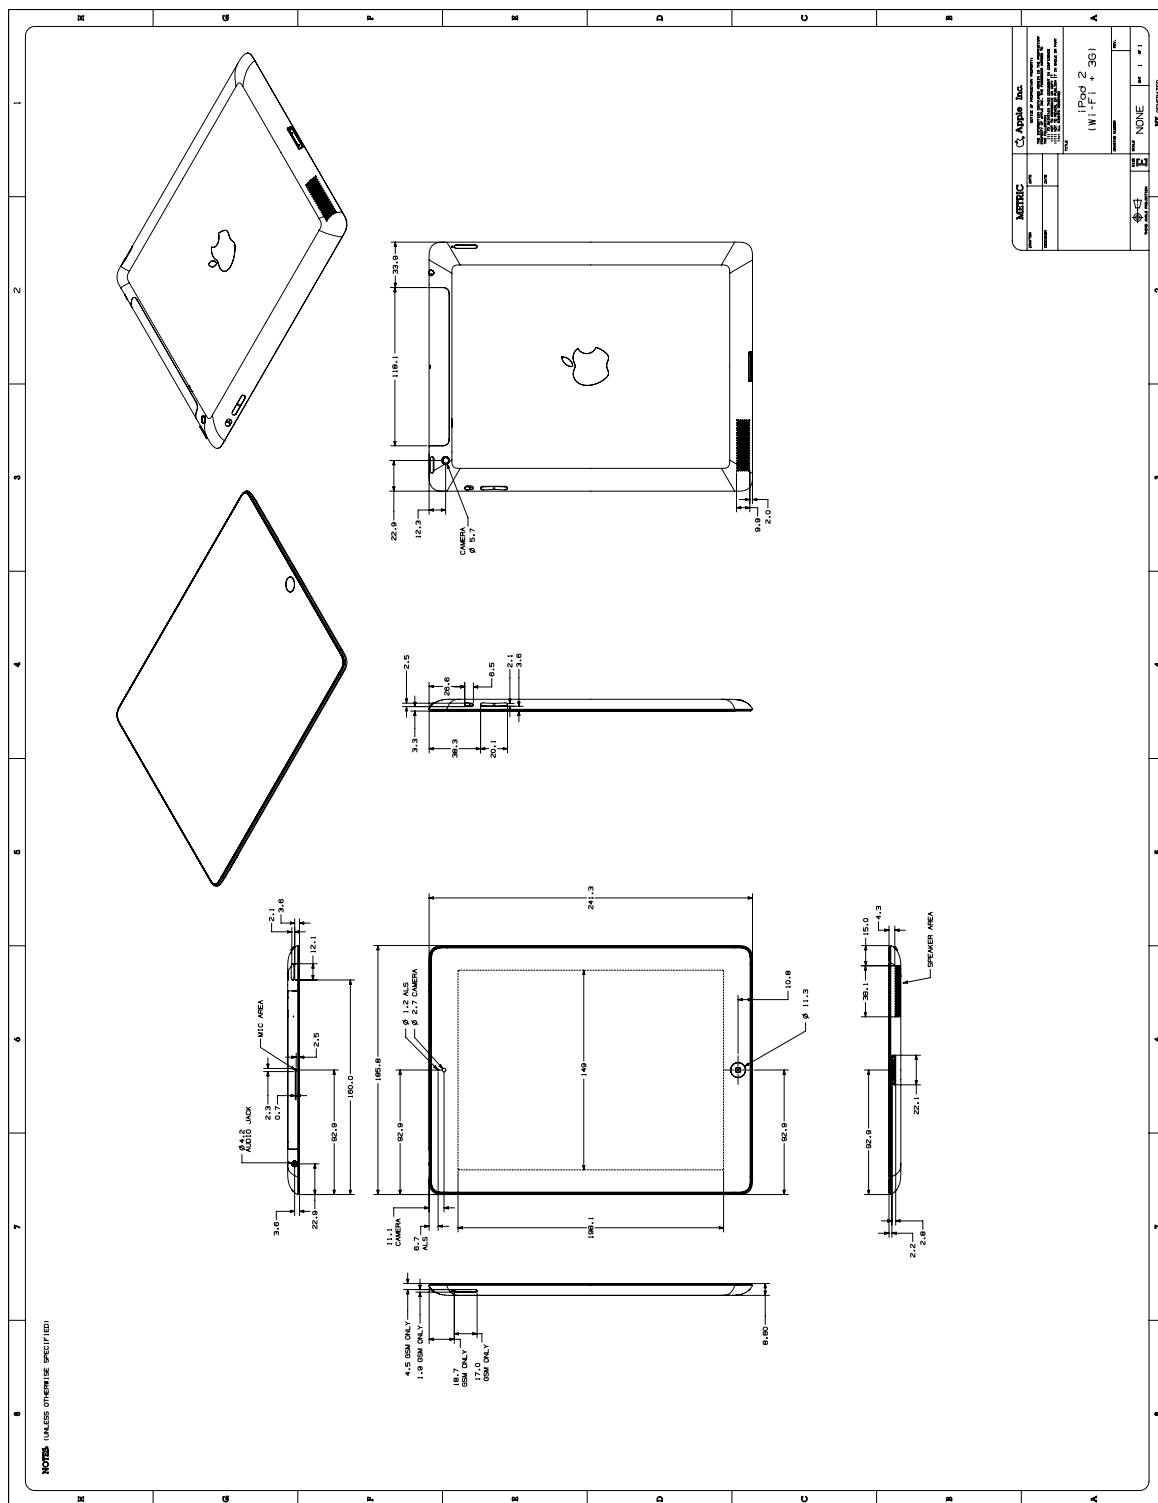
iPad 2 with Wi-Fi Dimensional Drawing
